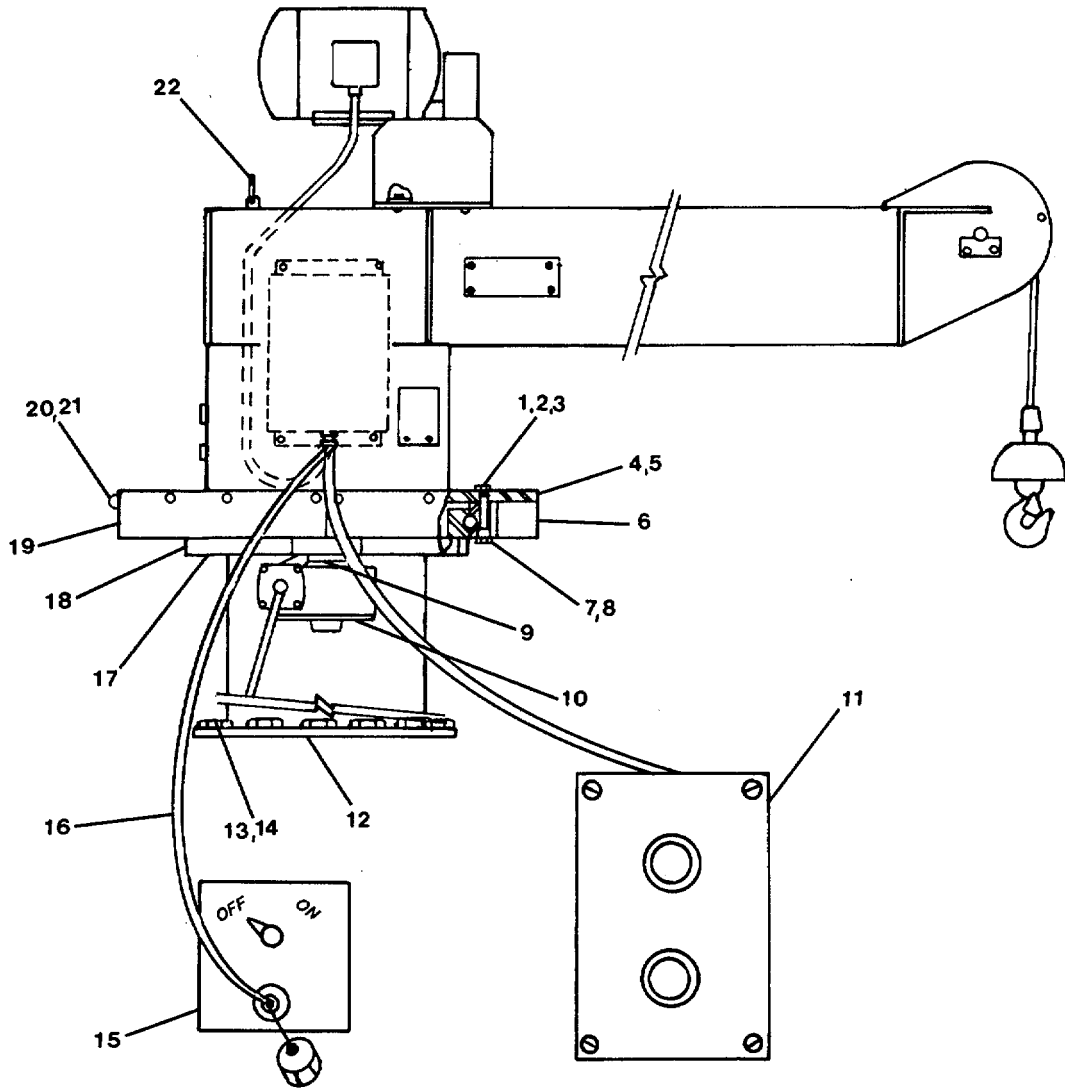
Replace/Repair Crane Assembly.
